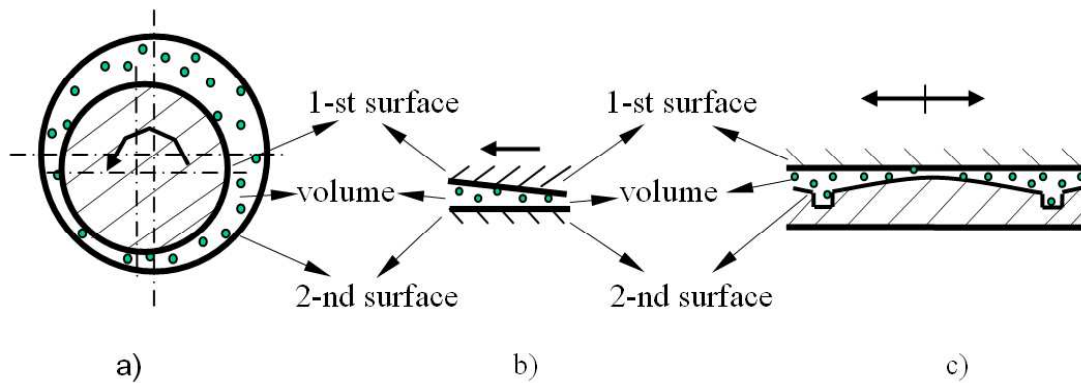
a) Cylindrical bearing, b) basic schematic and c) sliding plate.
